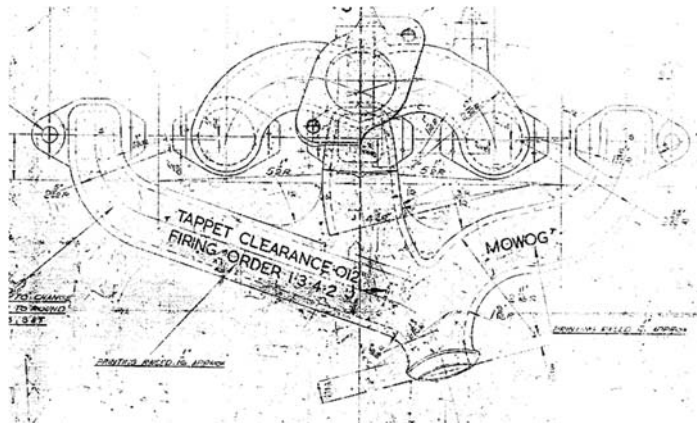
Inlet and exhaust manifold 998cc 12G3279.
